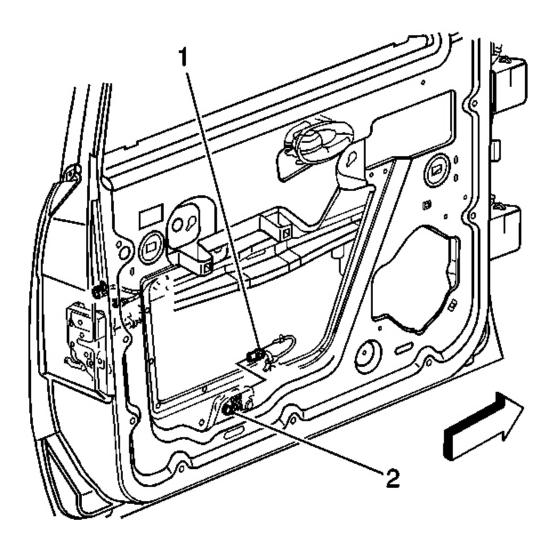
Removing/Installing Side Impact Sensor Courtesy of GENERAL MOTORS CORP.
